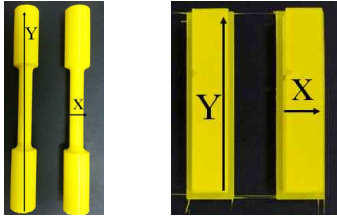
Tensile test specimen and izod impact test specimen with two different directions
